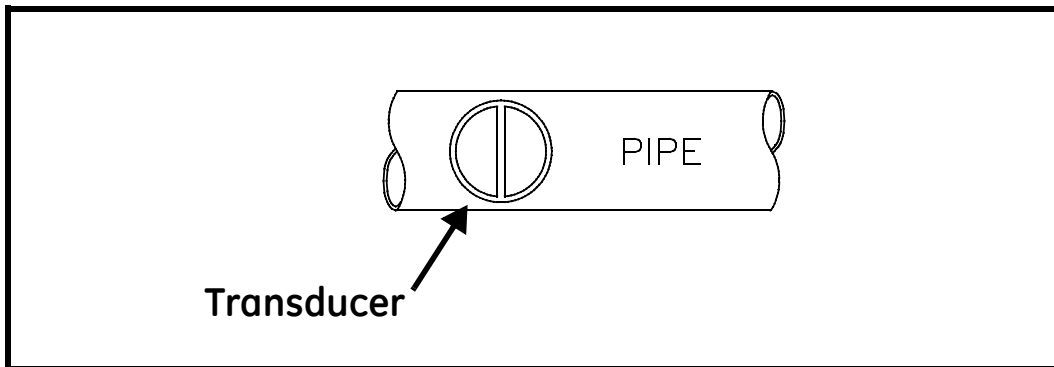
Proper Alignment of Transducers for Cylindrical Surfaces
